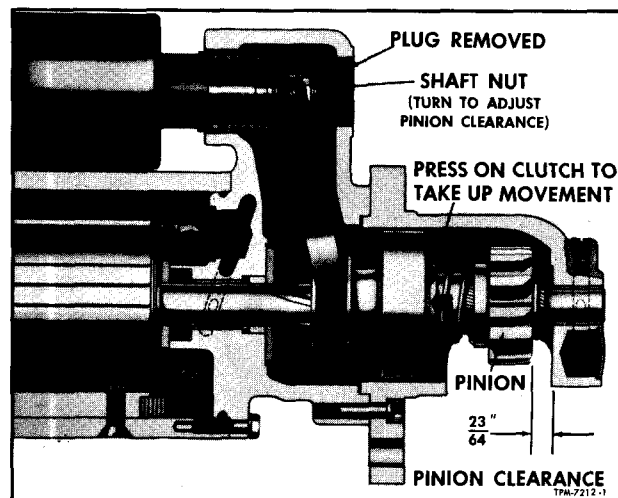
Measuring Pinion Clearance (Heavy Duty)
